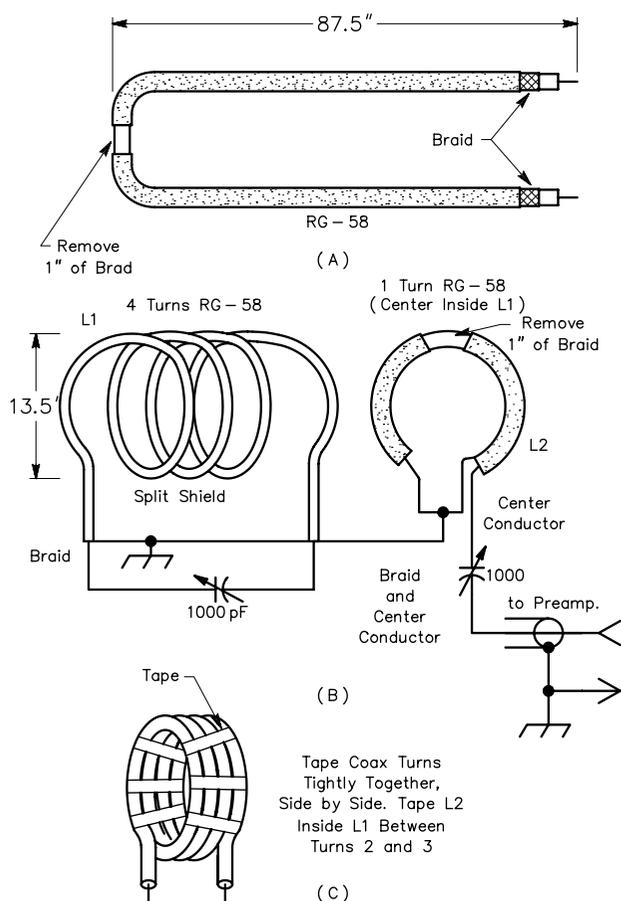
Components and assembly details of the shielded loop shown in Fig 14.
